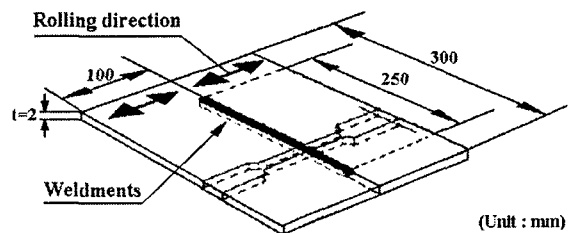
The weld coupon and the extraction of the tensile specimens.
